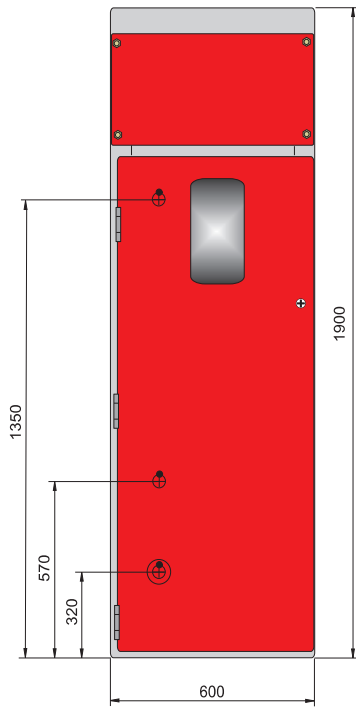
Front view of 12 kV cable panel with switch-disconnector H 22 EA/EK and disconnecting switch
